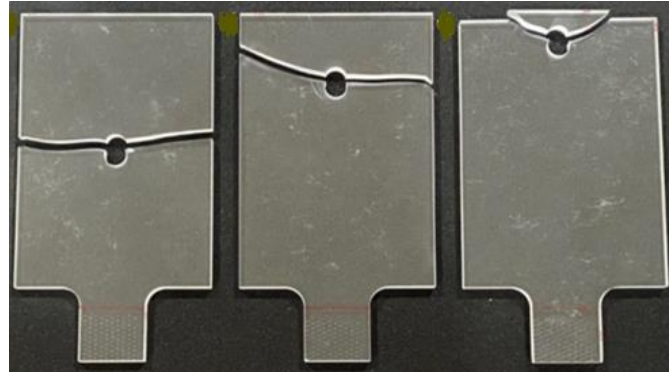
Specimen fracture with 8 mm pin: left) Specimen #4, center) Specimen #5, and right) Specimen #6.
